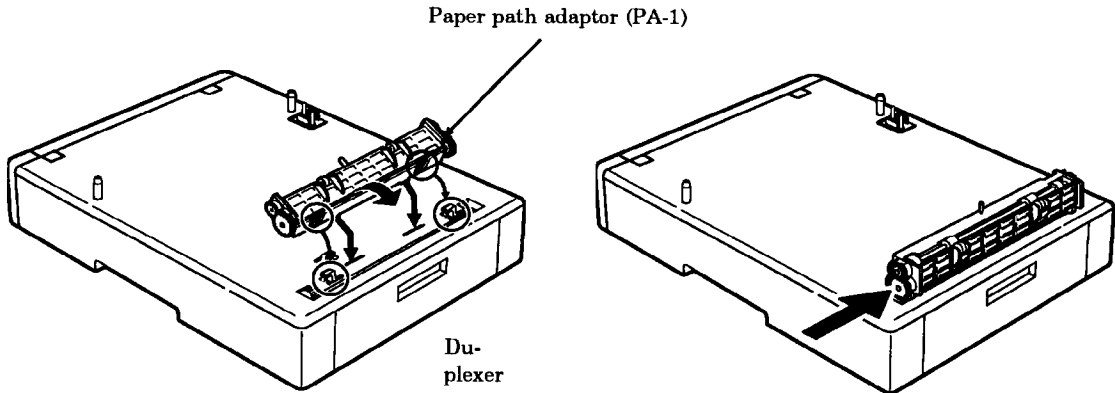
INSTALLING THE PAPER PATH ADAPTOR
